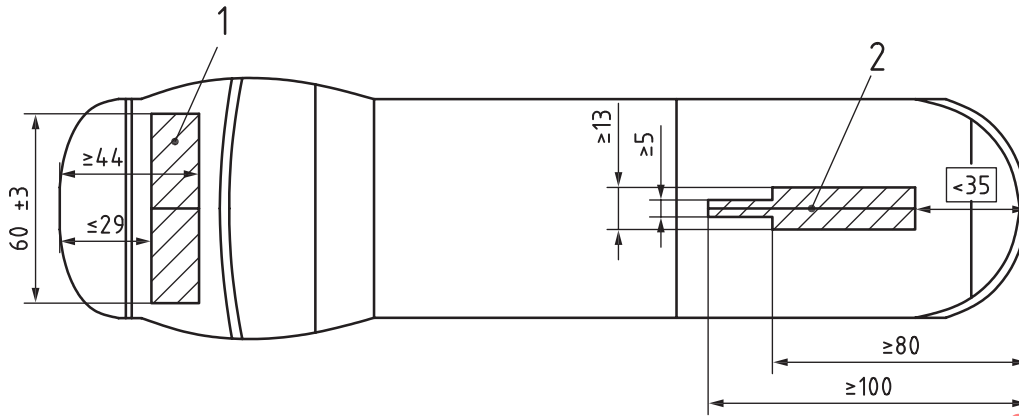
Test body for free space at rear of boot, Type C4.3.5 Bearing surfaces4.3.5.1 Low friction zone dimension
